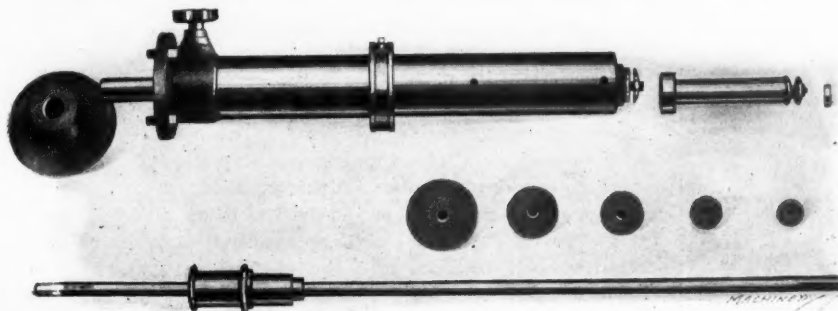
Grinding Spindle and Wheels used on Wood & Safford Grinder
